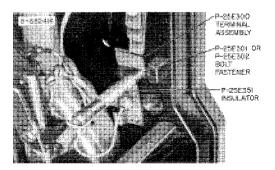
Terminal Assembly, Insulator, and Bolt Fastener
